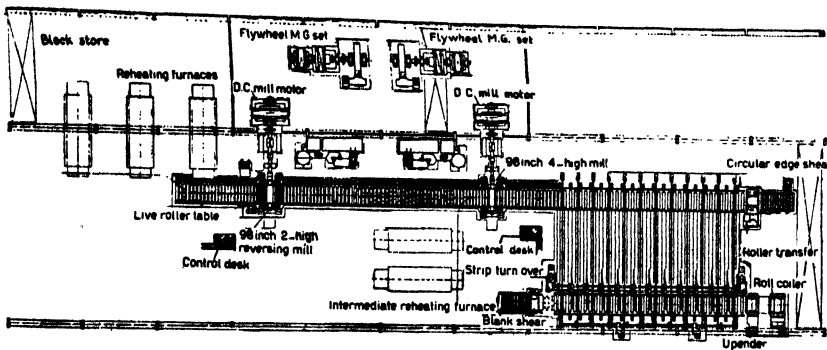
Layout of hot mill with 2 stands (E. Ullmann).
